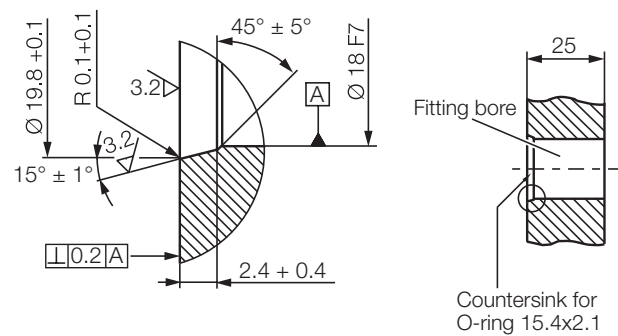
Mounting hole for installing the BTL with O-ring
